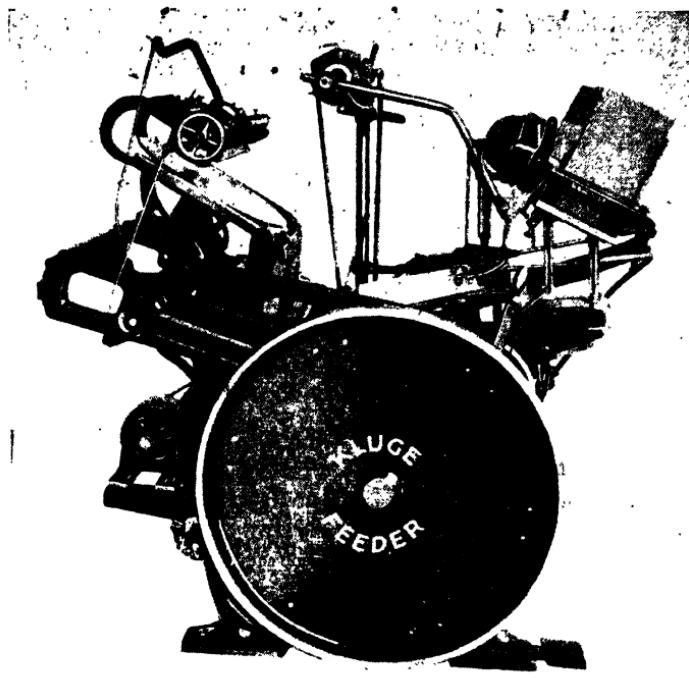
Job printing press with mechanical feed. (*Courtesy of Brandtjen and Kluge, Inc.*)
